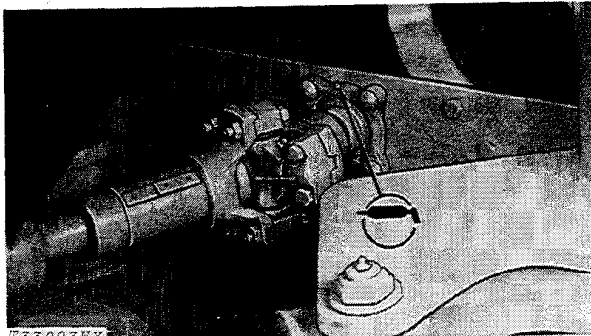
Front Drive Shaft Support Bearing (1 Point)
